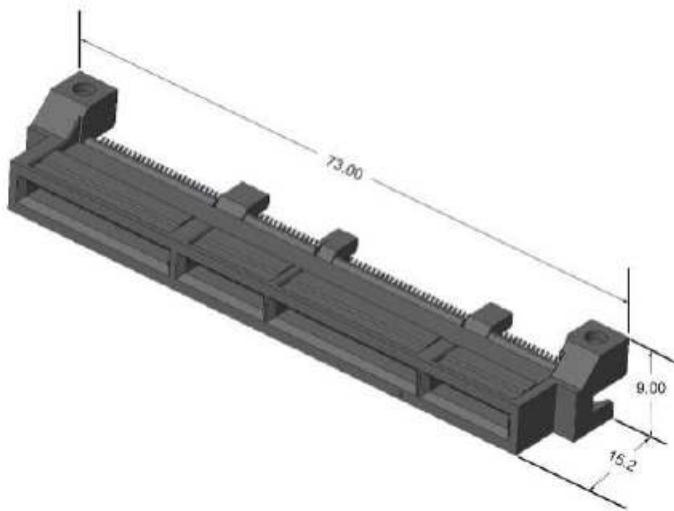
Card Edge Connector Dimensions – Top Side (“B” Pins)
